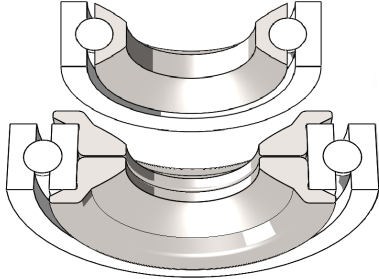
Illustration showing the reduction of ring size when custom bearings are used. The bottom ring represents the current setup with the use of off the shelf bearings, where the top represents the ring size if custom bearings are used.
